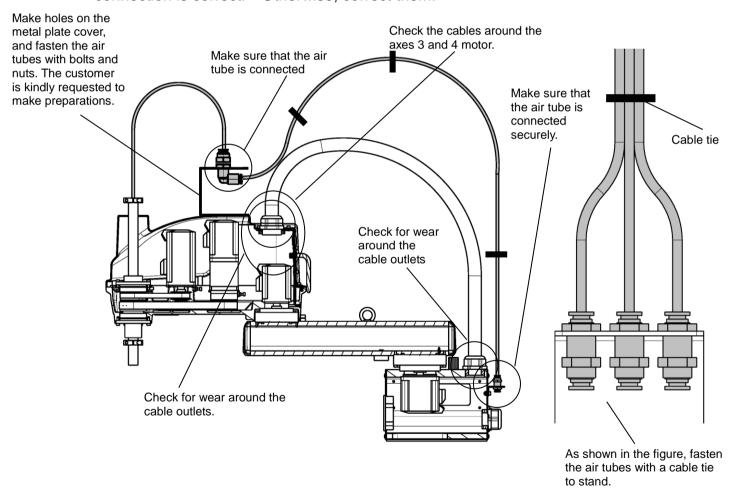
Cable inspection locations (KHL-500, KHL-600, KHL-700)
